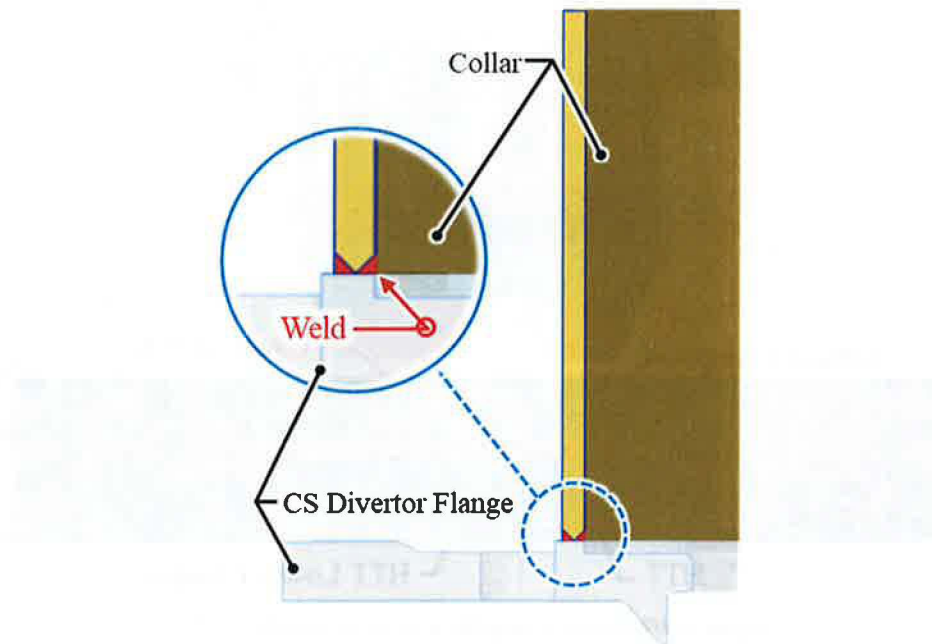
Weld to be tested between the divertor flange and collar
